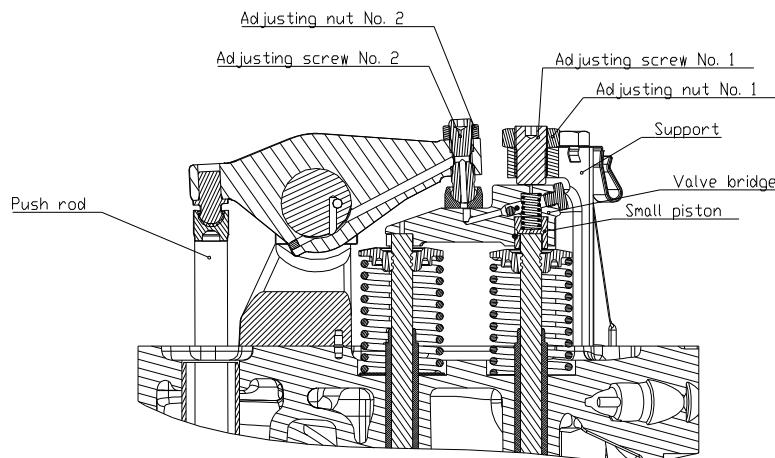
Exhaust Valve and EVB Clearance Adjustment
